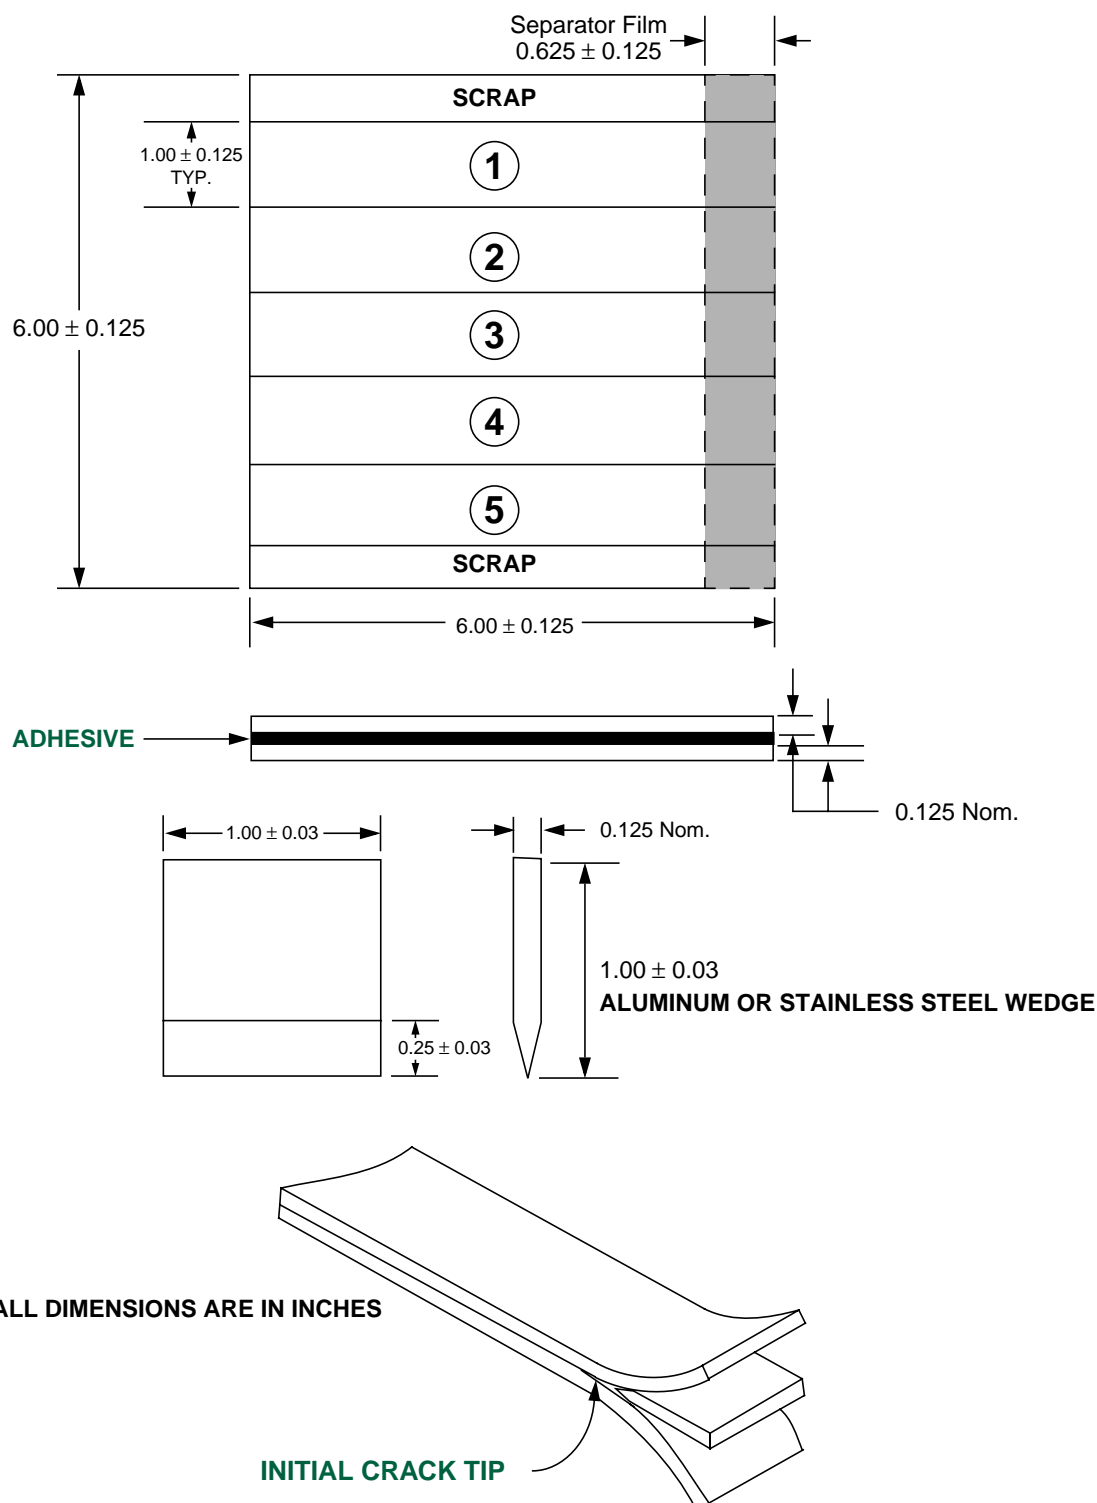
CRACK EXTENSION SPECIMEN CONFIGURATION FOR ALUMINUM CLEAN LINE PROCESS CONTROL
